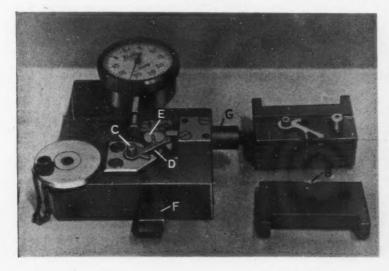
A Set of Inserts for Holding Drive Pawl Pressings in the Fixture on the Grinding Machine is Seen at the Right. The Gauge Employed for Inspecting the Ground Pressings is at the Left. incorporates a Dial Indicator for Checking the Position of the Rounded End of One Arm Relative to the Pivot Hole, and a Sliding Stepped Plunger for Checking the Angular Relationship of the Two Arms
